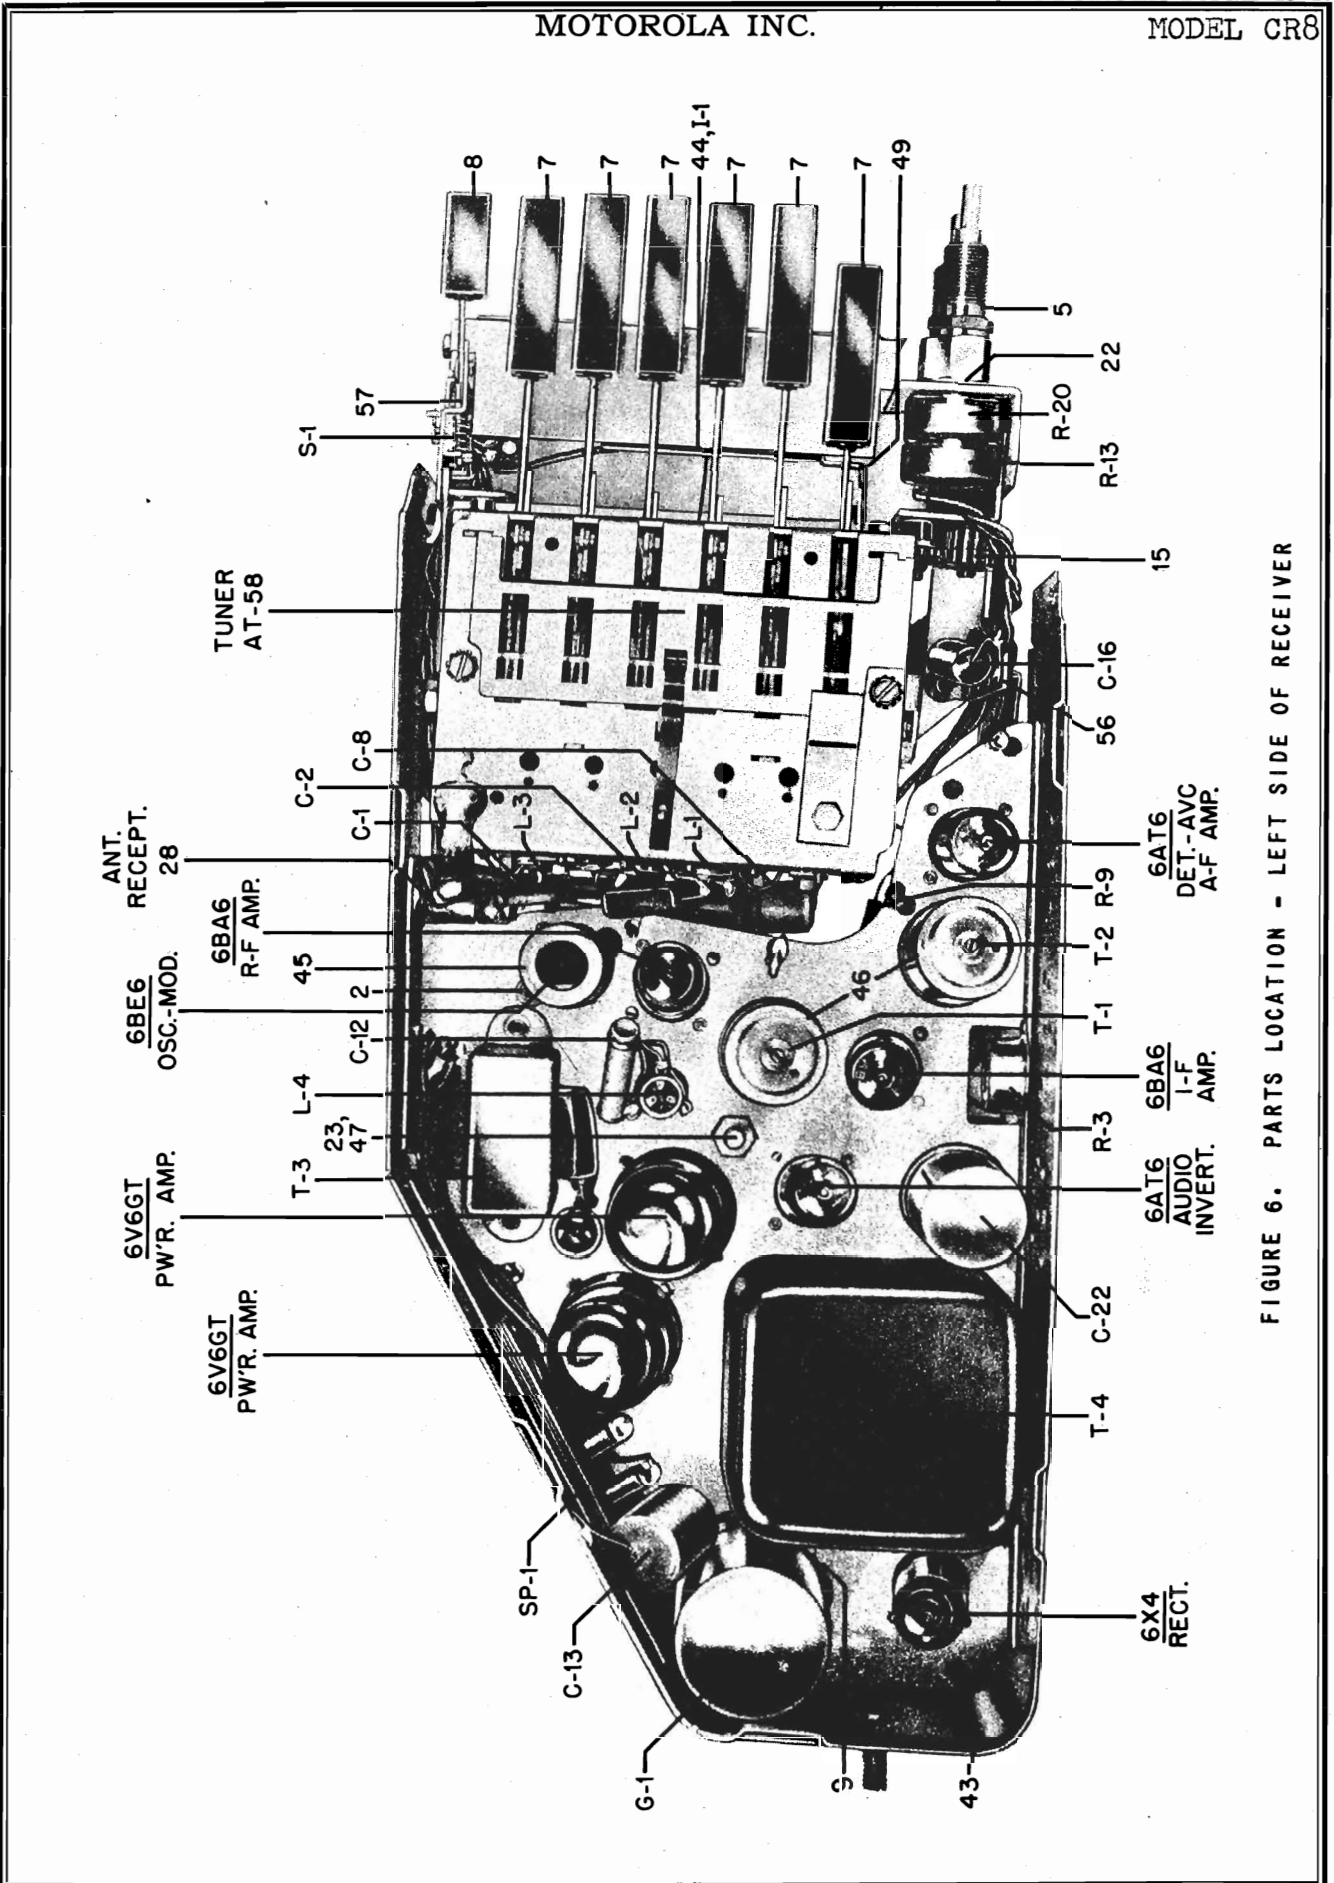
PARTS LOCATION - LEFT SIDE OF RECEIVER
